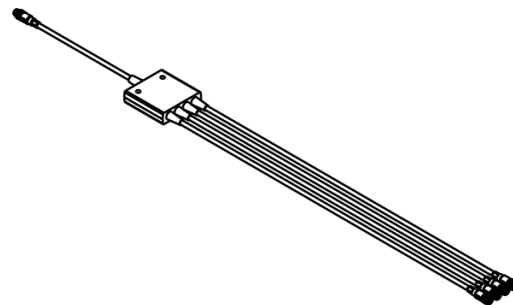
Fixture Transmitter 33-0120-30 mounting dimensions
